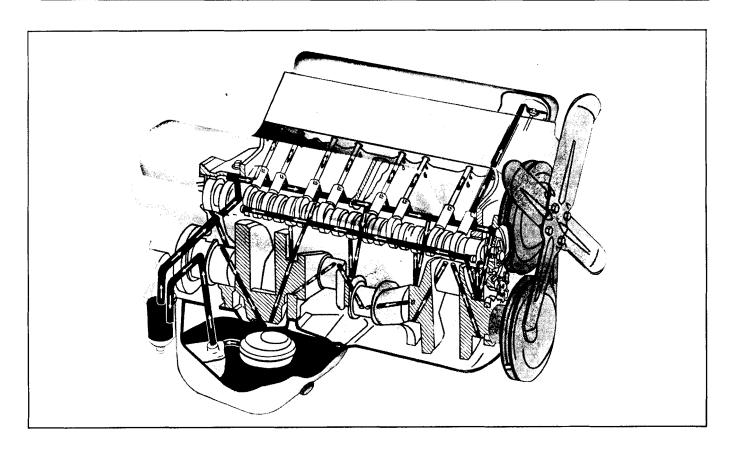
A-22 Engine Lubrication (V-8 except 307)
